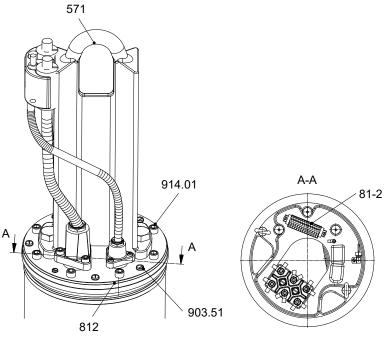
Removing the motor housing cover, pump set with standard sensors
